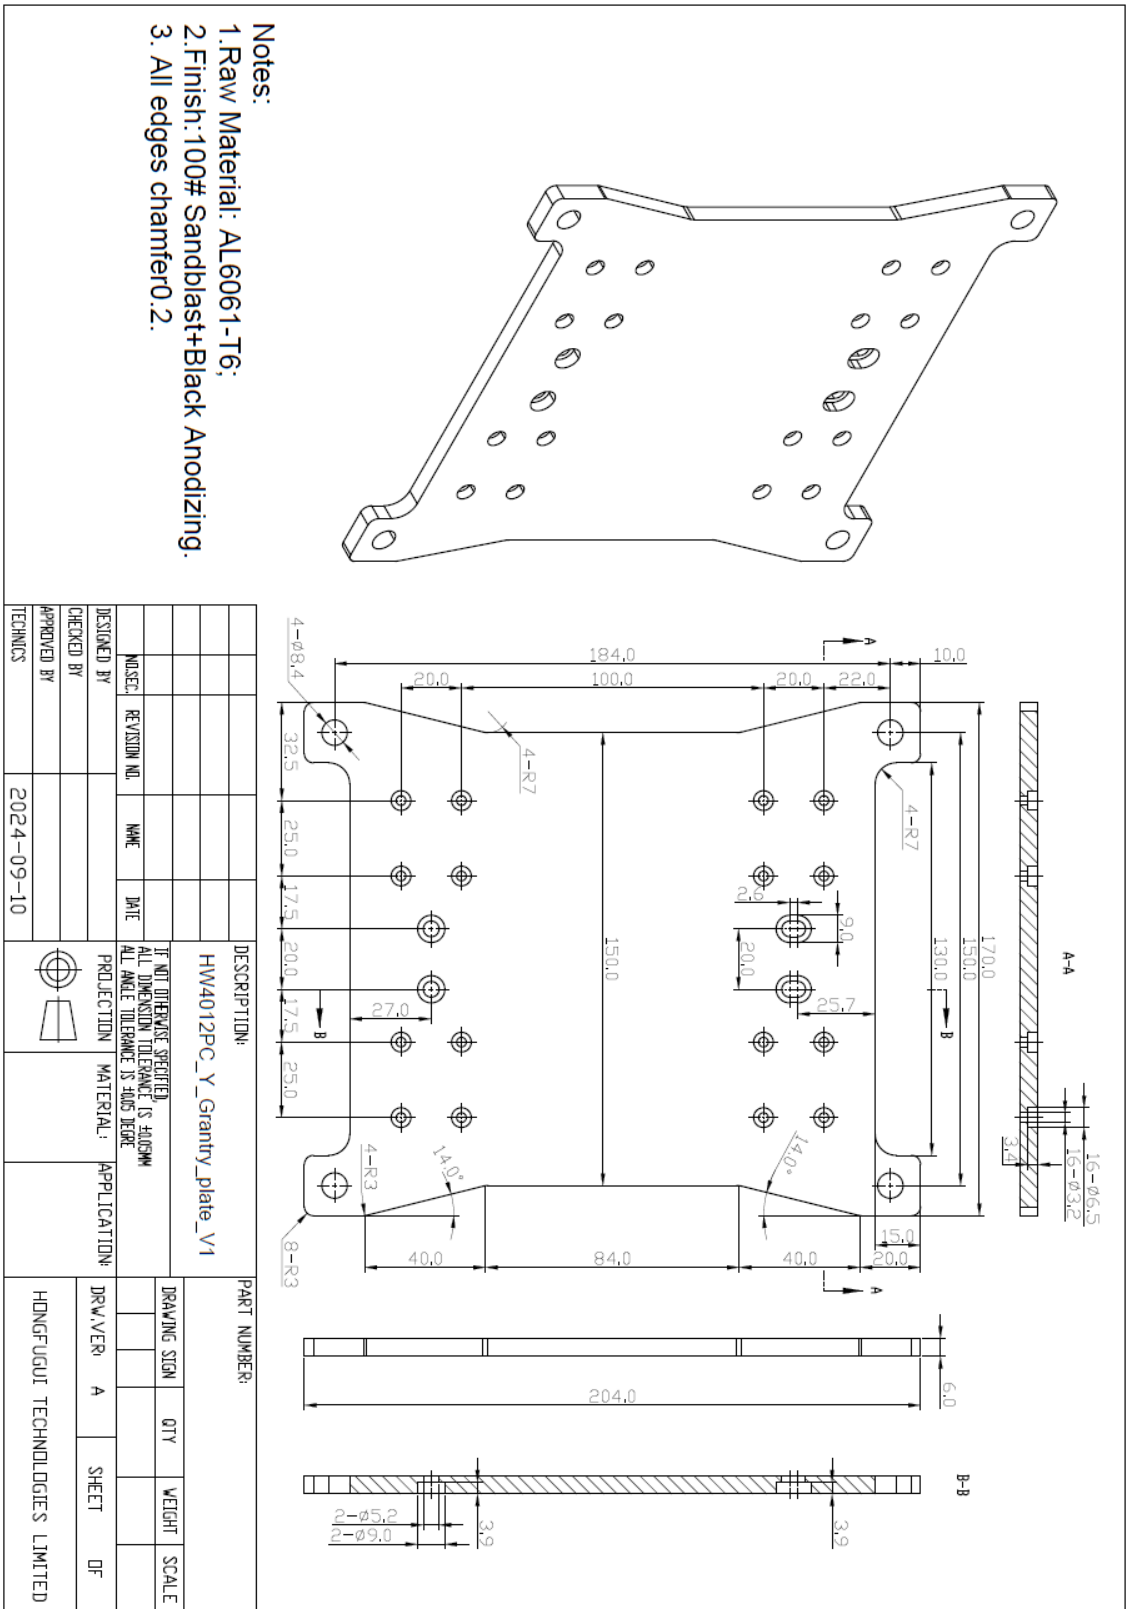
Y Gantry plate technical draw by the manufacturer.
